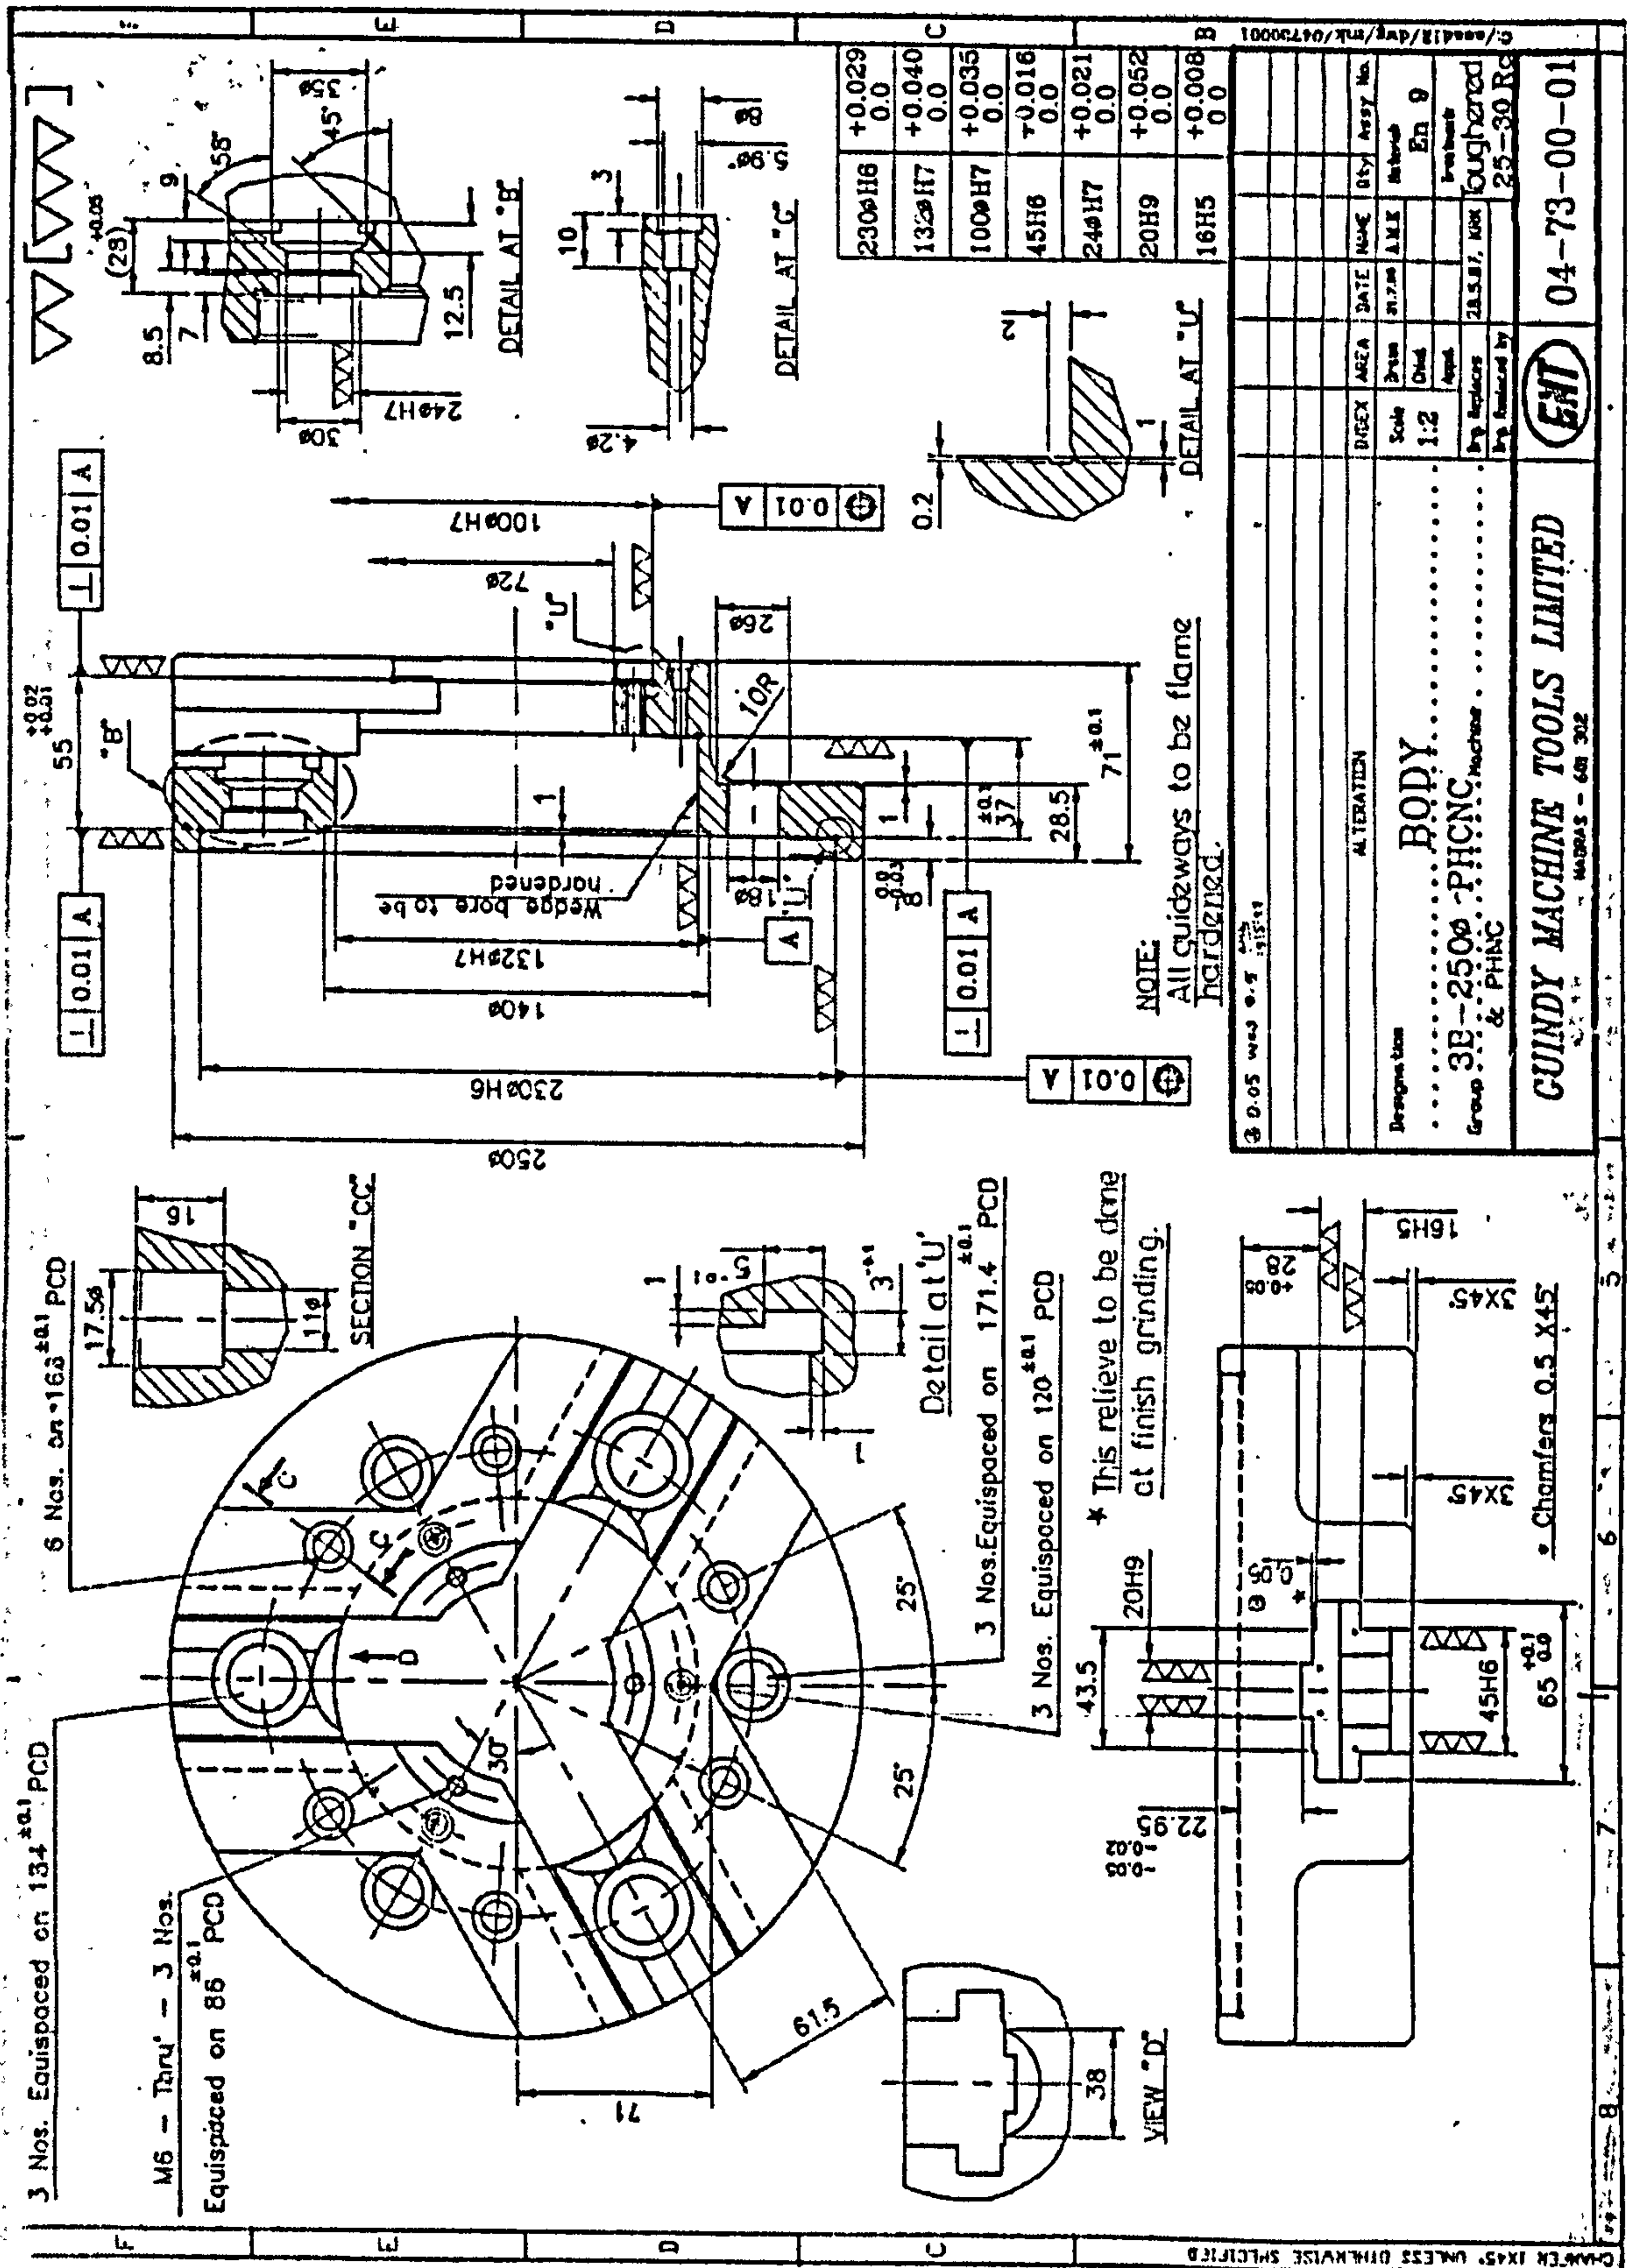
GMT Chuck Body – Example Manufacturing Drawing
